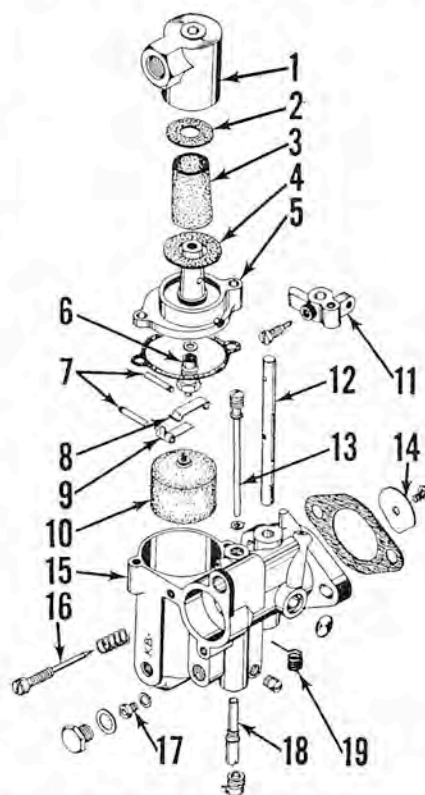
Exploded view of Tillotson carburetor of the type used on most models.
